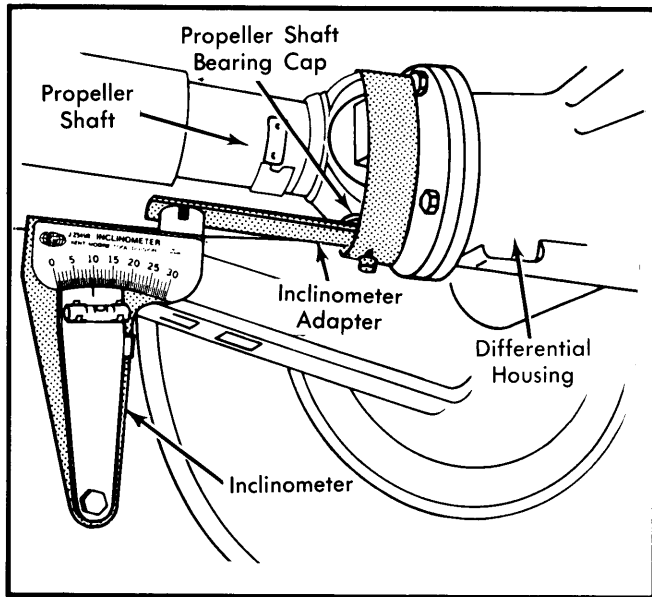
Measuring Rear Universal Joint Angle Using Inclinometer (J-23498 and Adapter J-23498-20)
